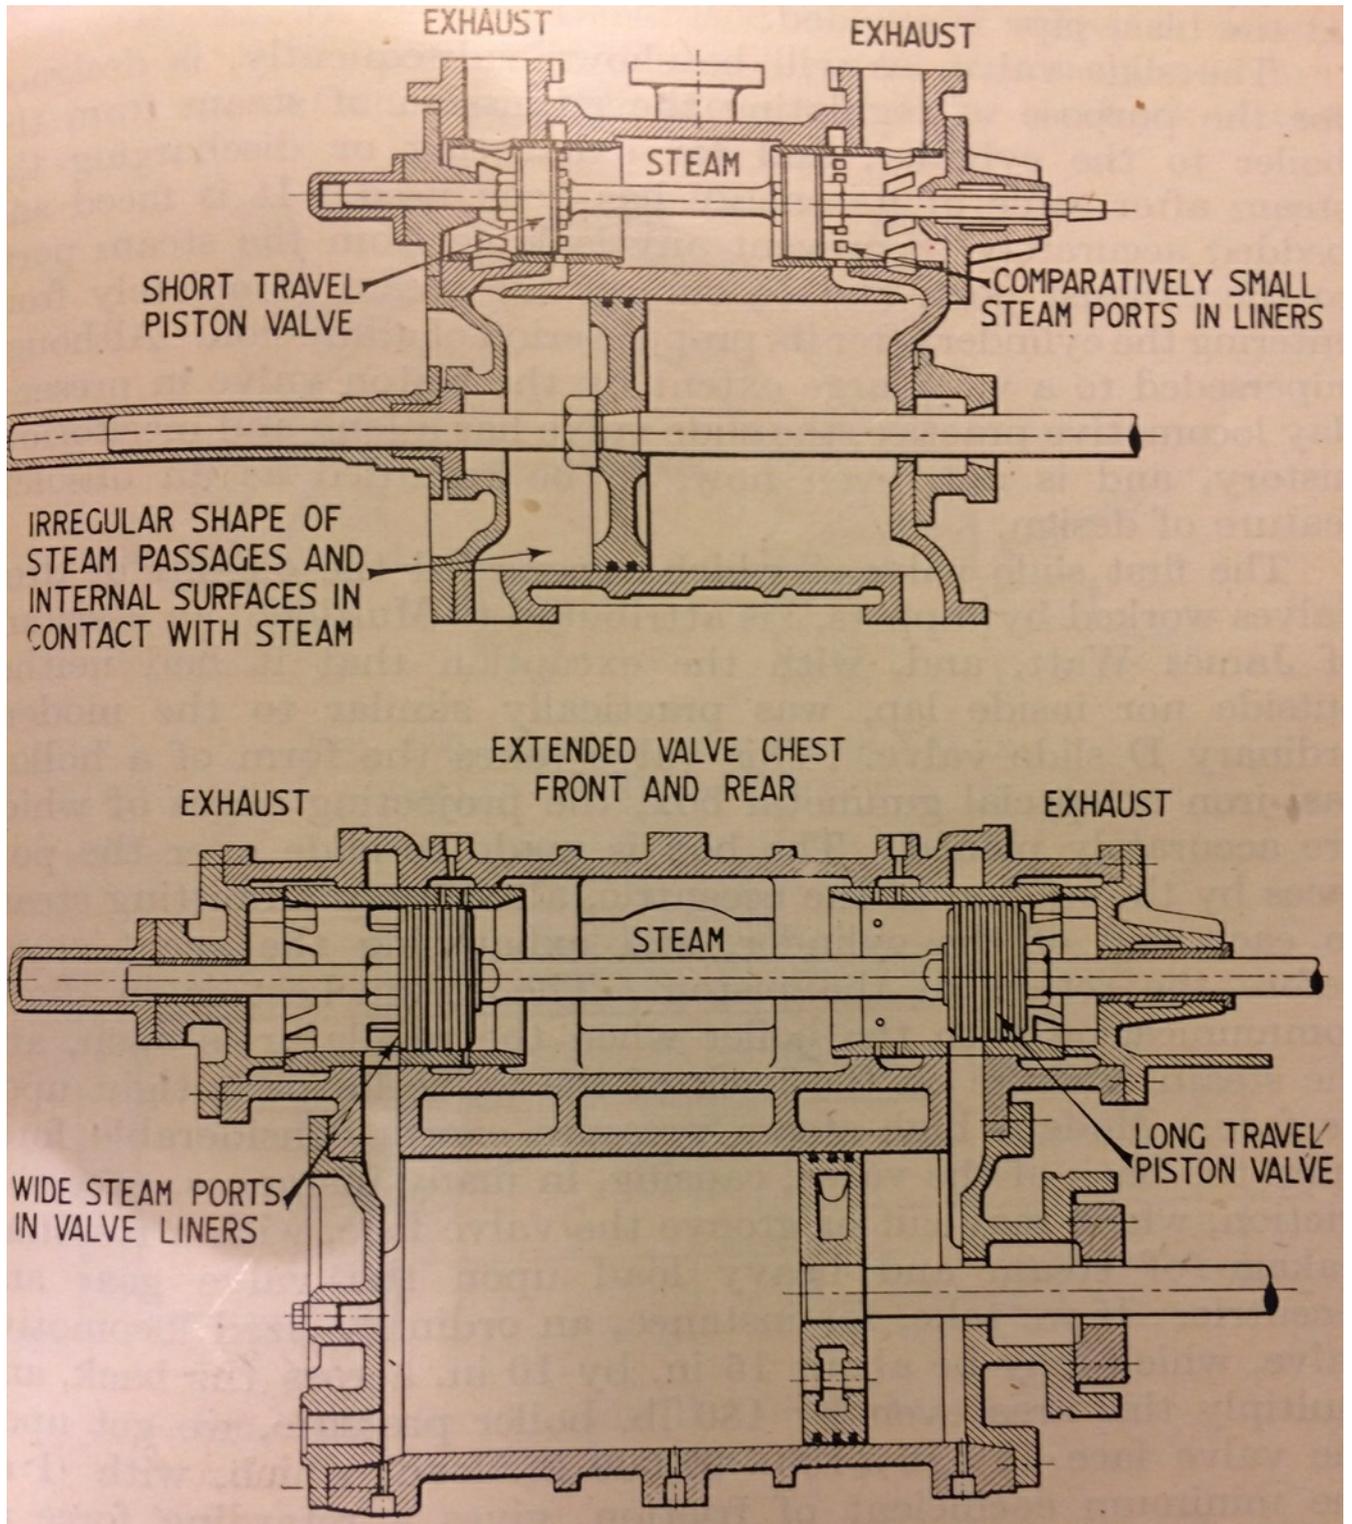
ABOVE : OLD PATTERN CYLINDER AND VALVE. BELOW : CYLINDER VALVE AND PISTON OF NEW STANDARD LOCOMOTIVES, L.M.S.R.
